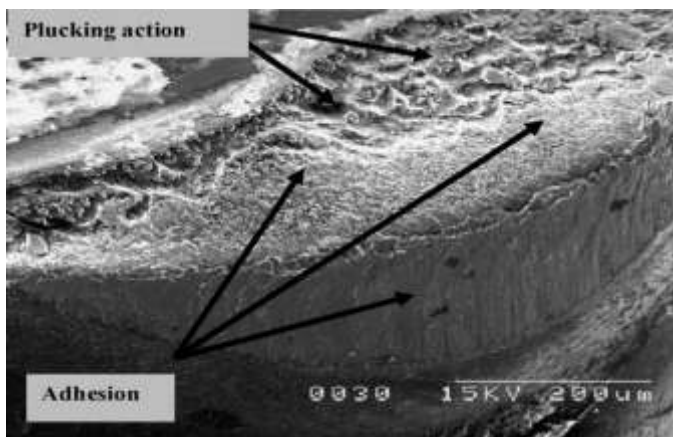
Worn PCD insert after machining with 11MPa coolant pressure at speed of 230m/min (tool life=17.5min) [26].
